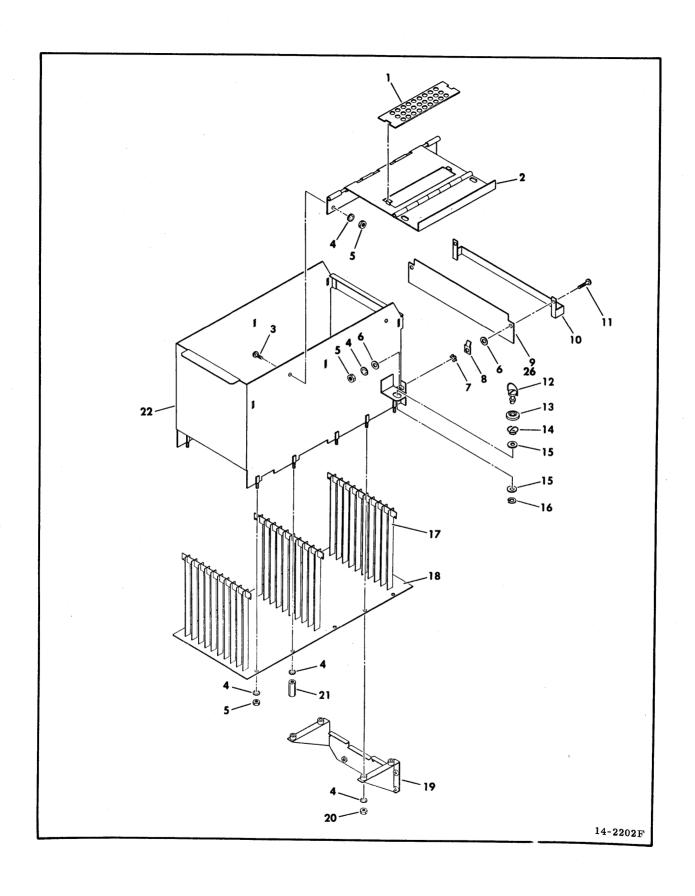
Logic Chassis Assembly (Sheet 2) S/C 17 & Abv
